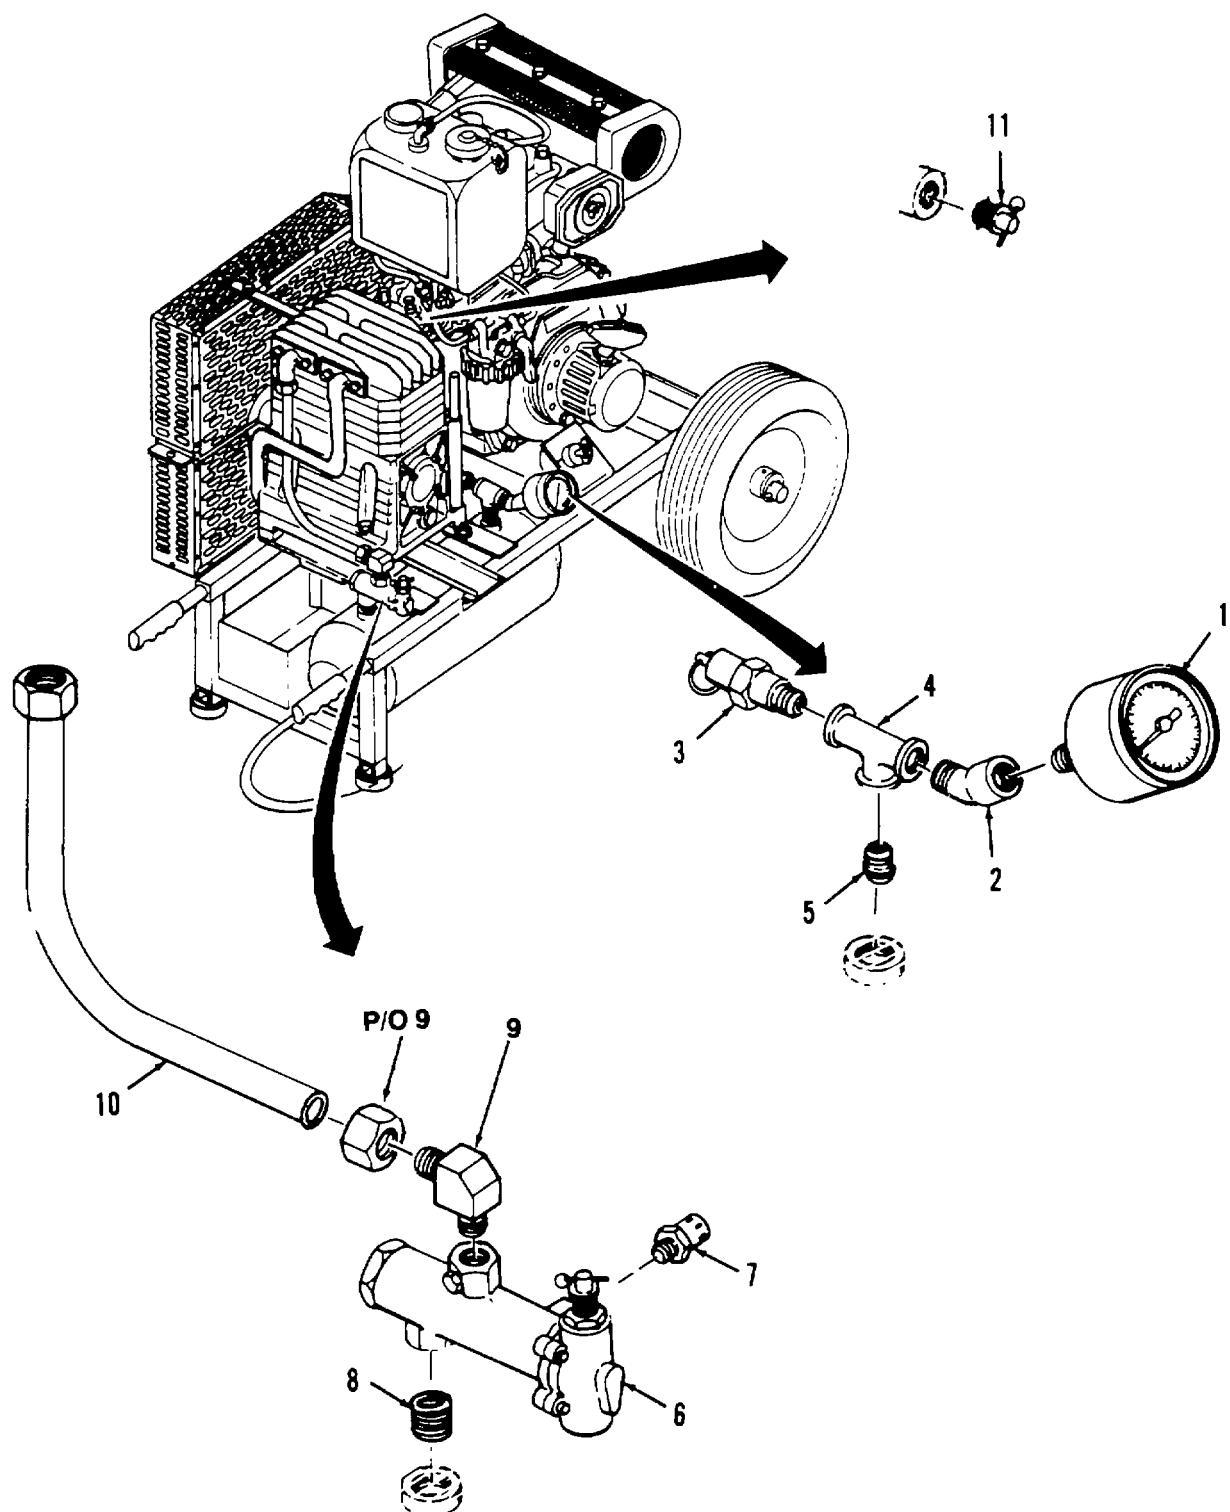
Air Gauge, Relief Valve, Unloader Valve, Unloader Valve Muffler, Safety Valve, and Discharge Tube
